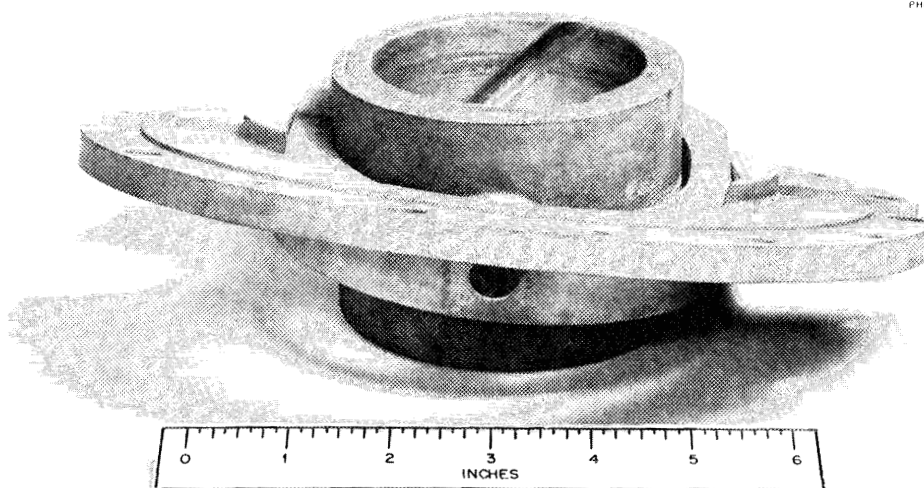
Gimbals-Mounted, Molten-Salt-Lubricated Journal Bearing.
